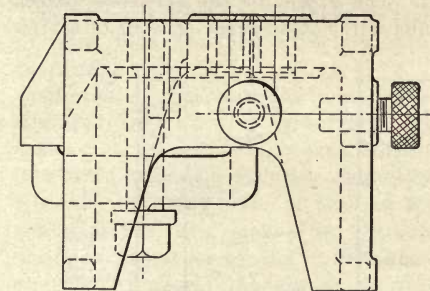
Design of Legs for Cast Iron Jig Bodies
